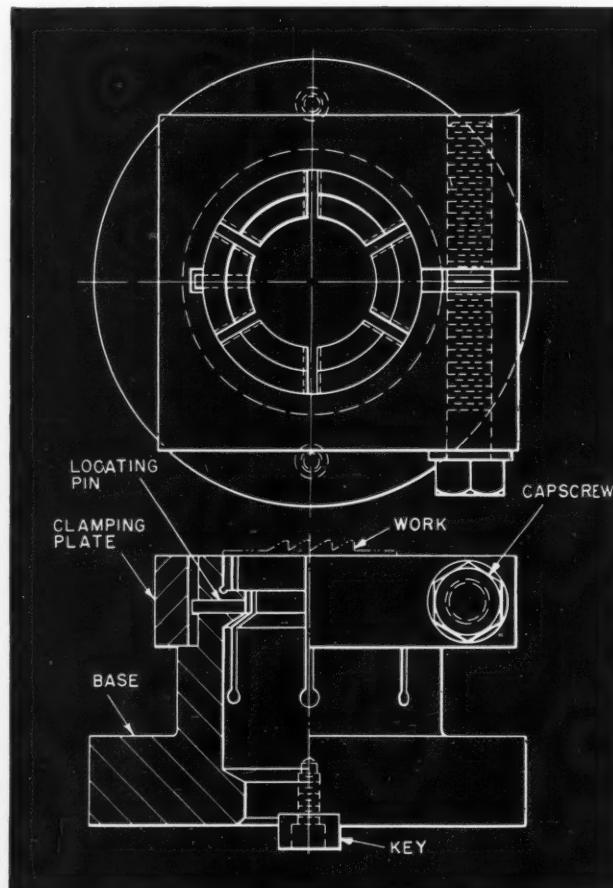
Milling fixture provided with a slotted base and a clamping plate to take care of variations in the diameter of the washers being machined
